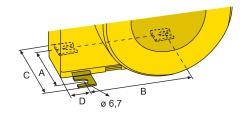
Dimensions, screw mounting with mounting brackets (diagonal)
